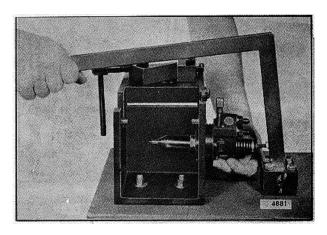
Checking Rack and Plunger for Free Movement using Tool J 22396
